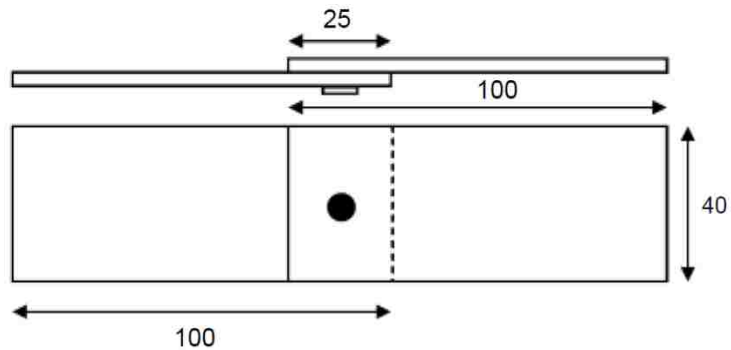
Lap shear specimen layout and dimensions for SPR joints [16].
